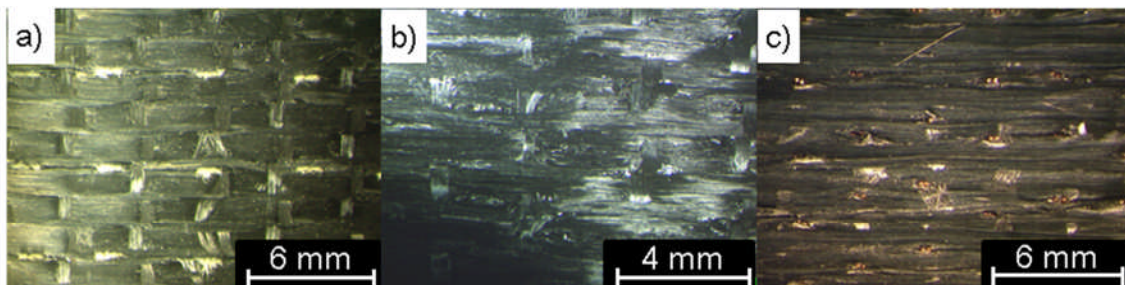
Delamination fracture surfaces of a) aramid, b) stainless steel and c) copper tufted bindered composite with tuft rupture at the delamination plane, for tufting depth of 5.2 mm
